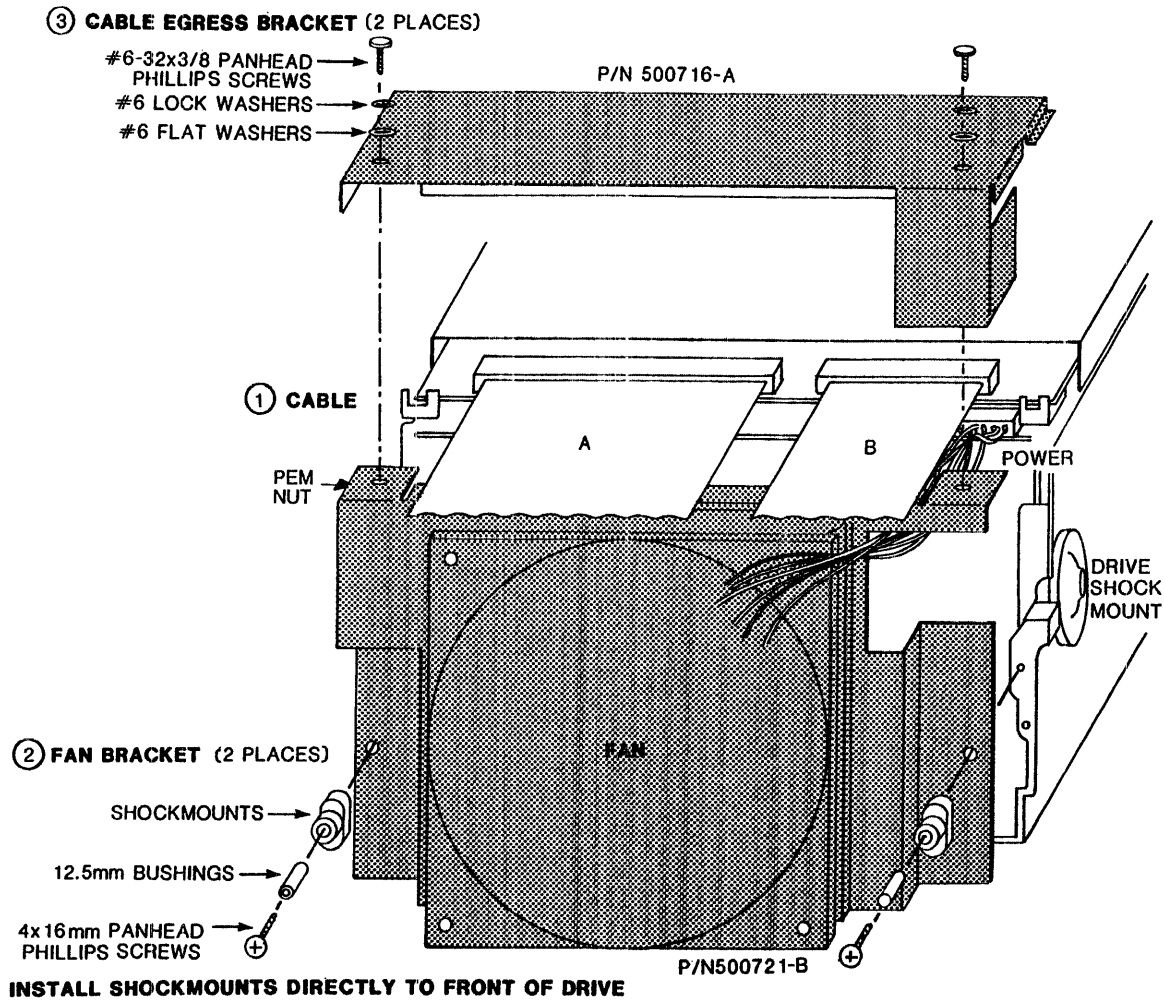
8" WINCHESTER DRIVE FAN BRACKET
